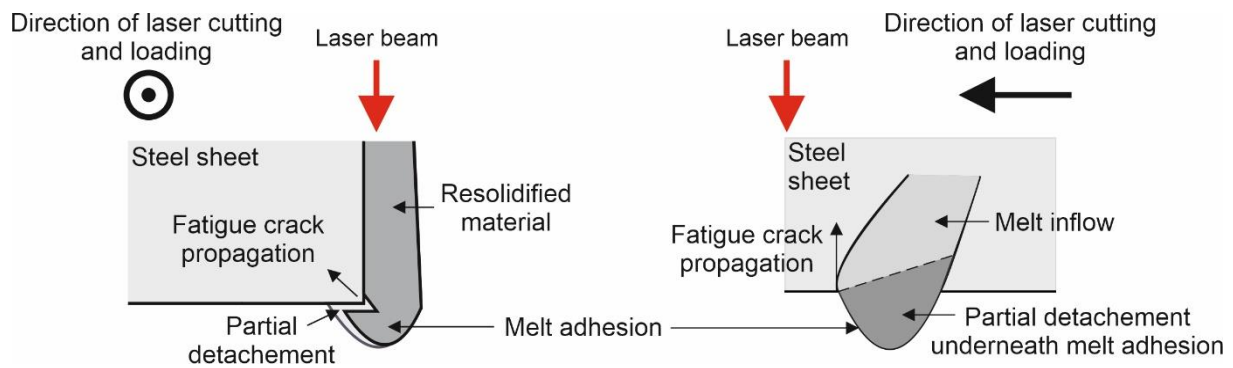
Schematic drawing for partial detachment of melt adhesions on strongly deformed laser-cut edges.
